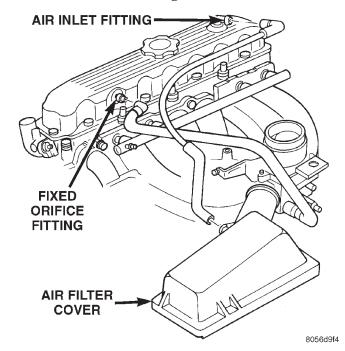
Install Orifice Tool 2.5L 4-Cylinder Engine
